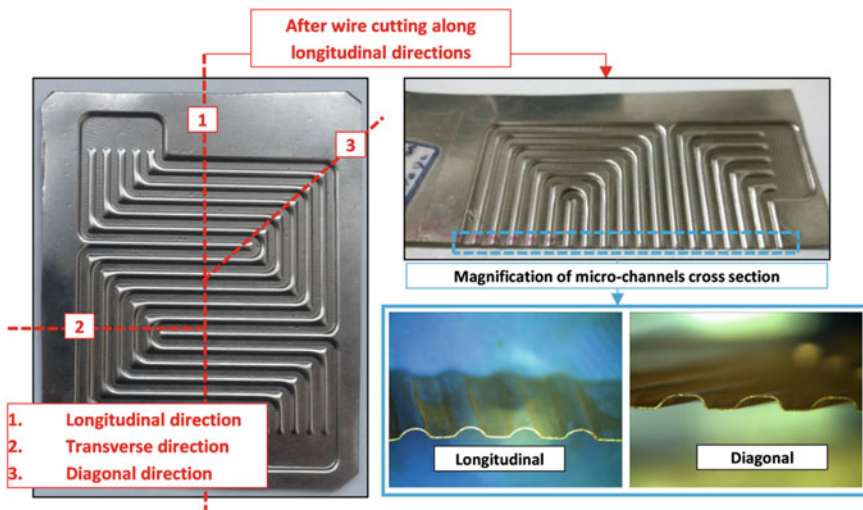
Fabricated specimens, cutting directions together with a magnified cross-section view
